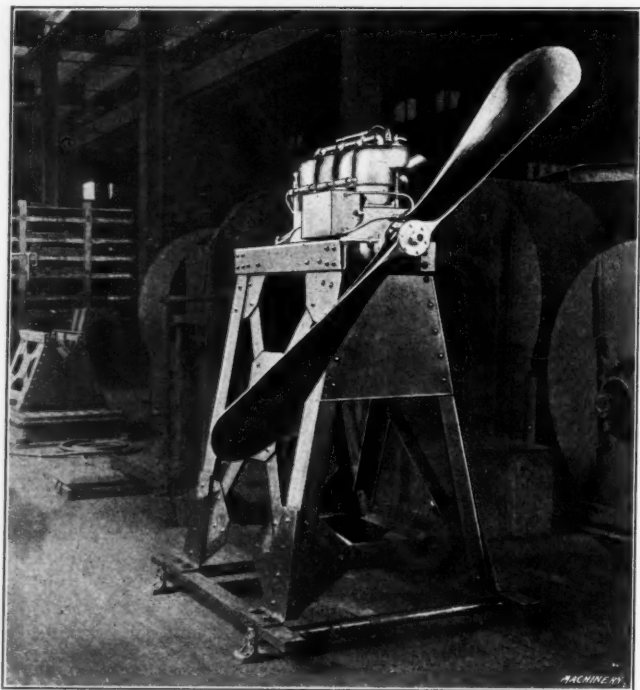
Four-cylinder Motor mounted on Testing Stand
